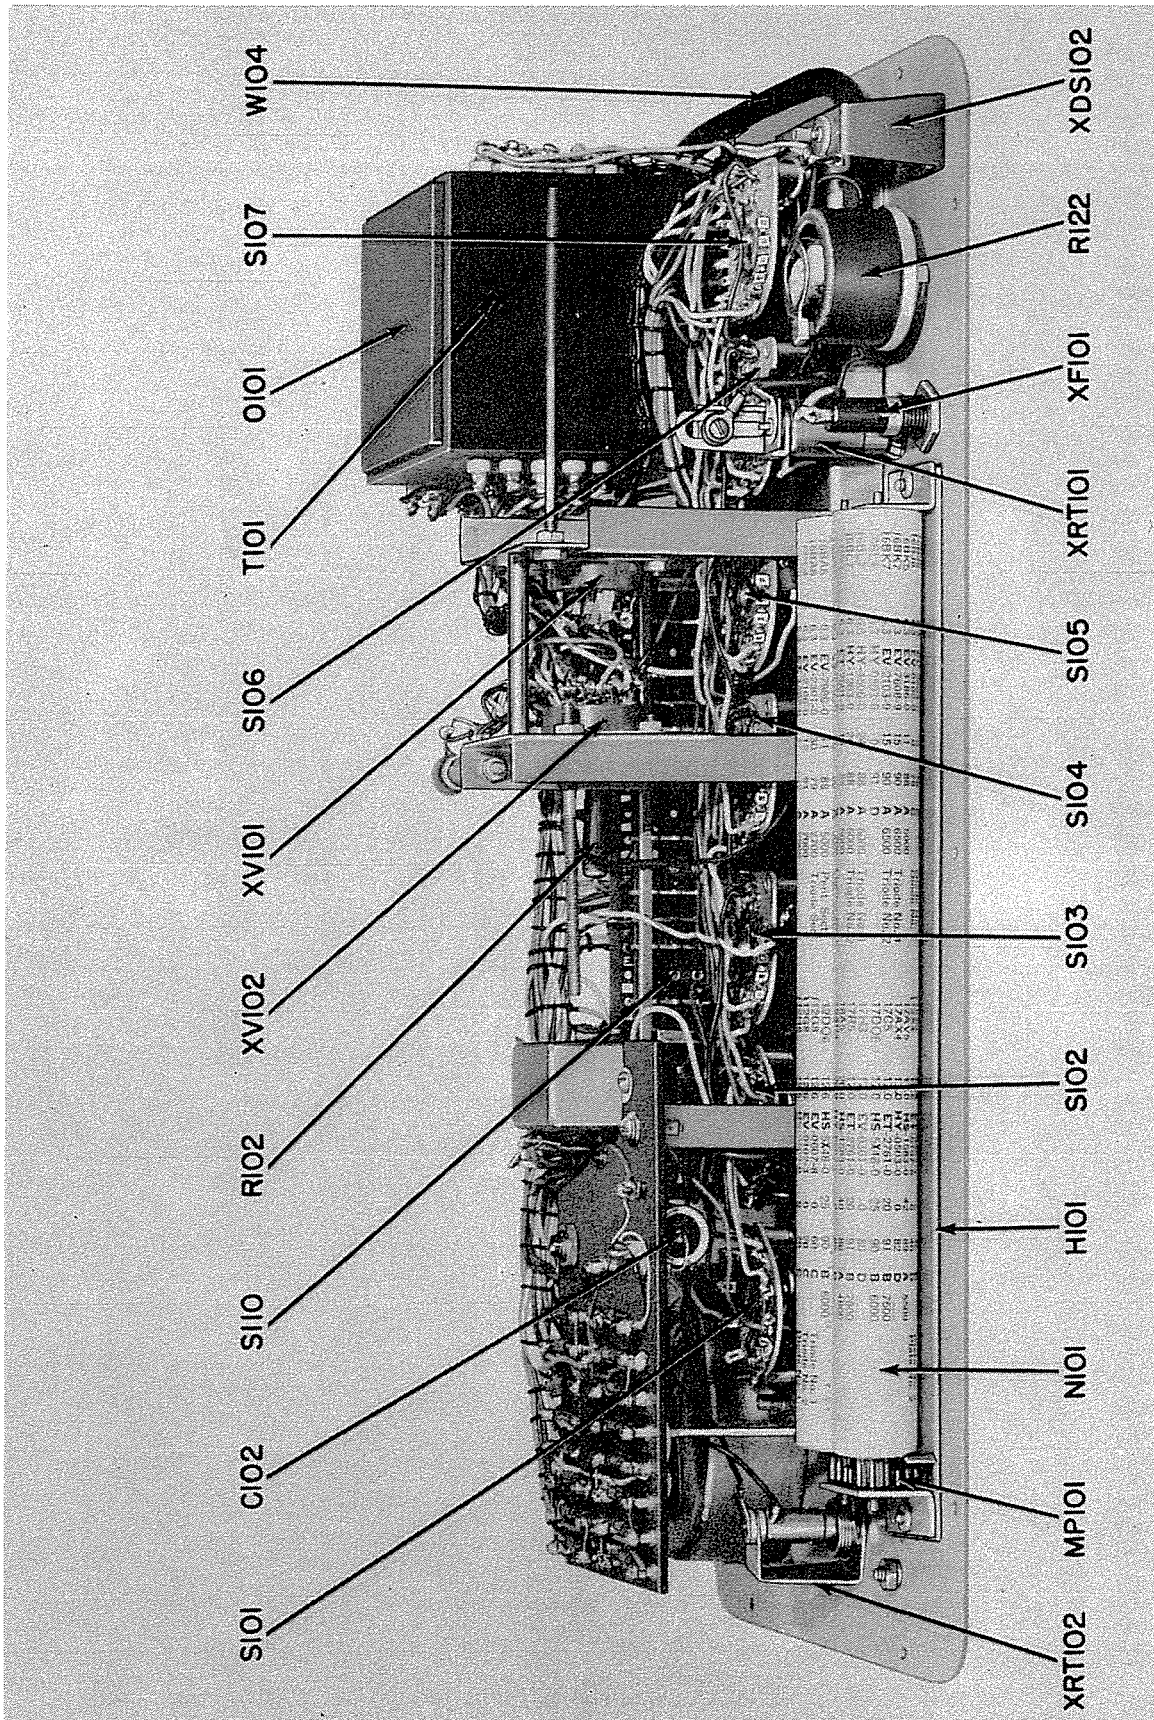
Rear View of Test Set, TV-10A/U From Bottom Edge of Panel
